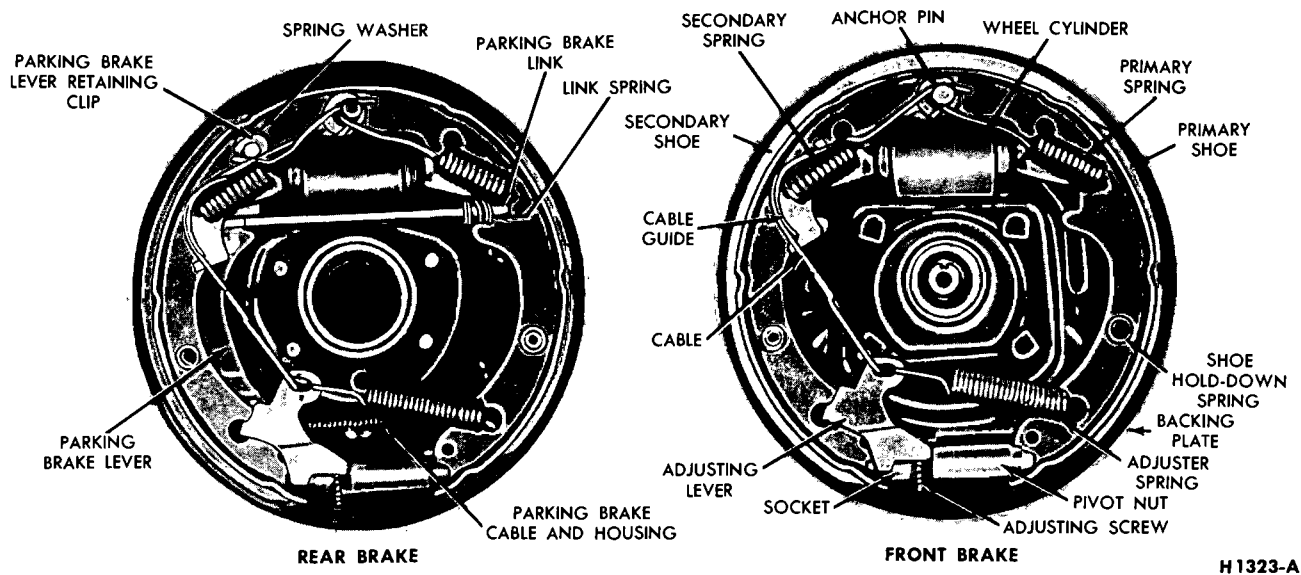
Self-Adjusting Brake Assemblies—9 Inch Drum
